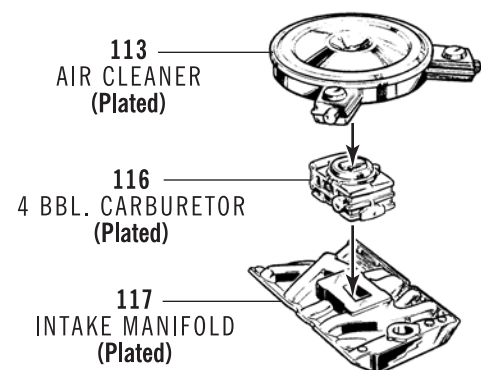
SUB-ASSEMBLY C/CUSTOM
